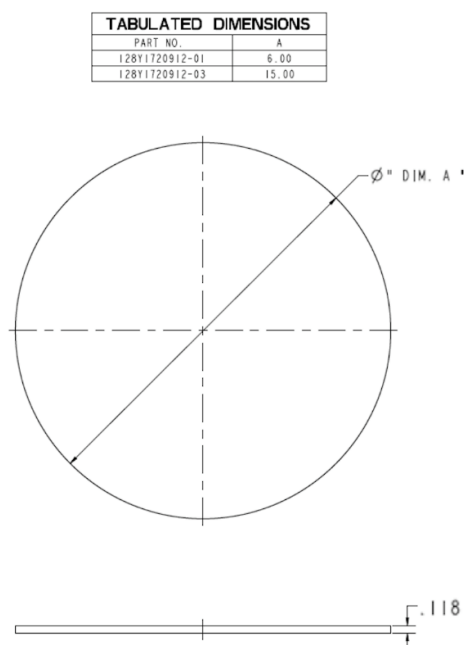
Engineering Drawing (128Y-1720912) of the Following HEU Plates: HEU 15/0 and 6/0 (Dimensions in Inches). (Not an original drawing.)
